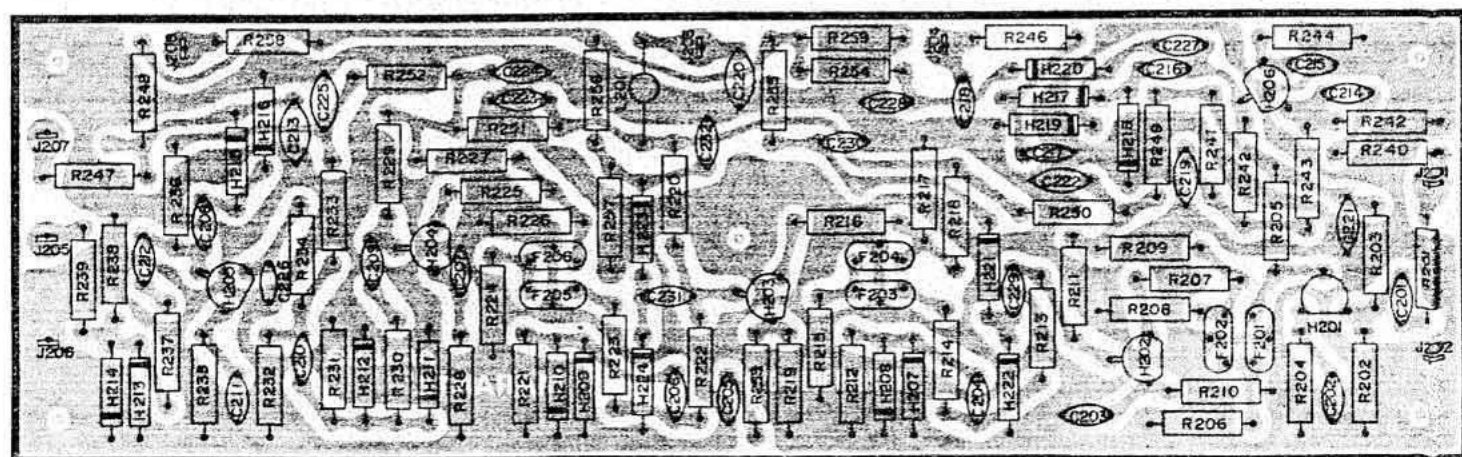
FM IF Amplifier Assembly P200 Component Locations
